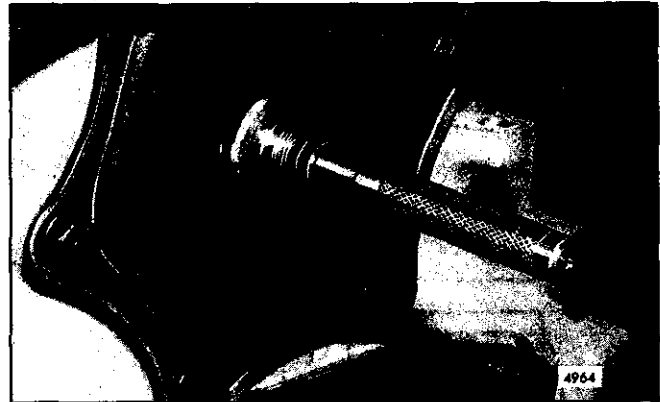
Checking Tachometer Drive Shaft Alignment
